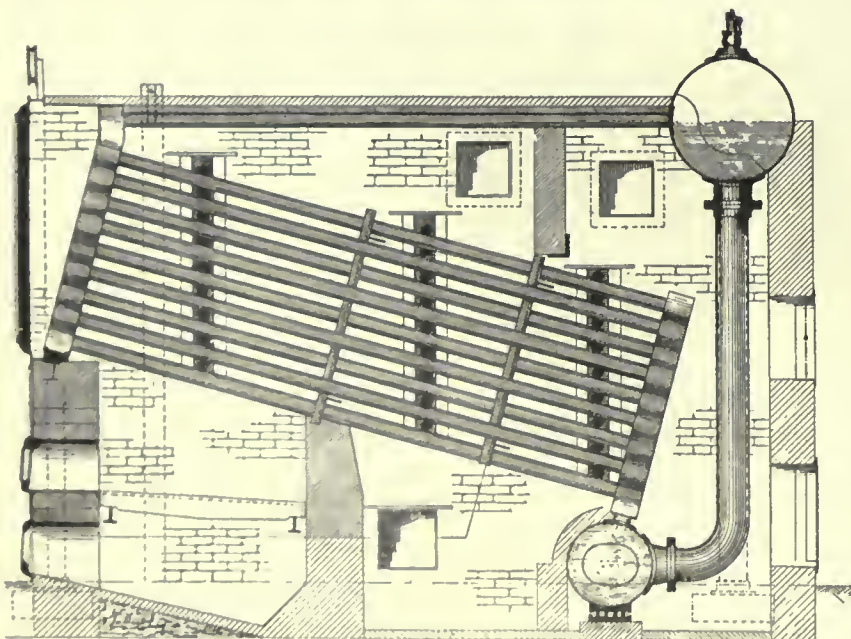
GOLDIE & McCULLOCH CROSS DRUM SECTIONAL WATER TUBE BOILER.
